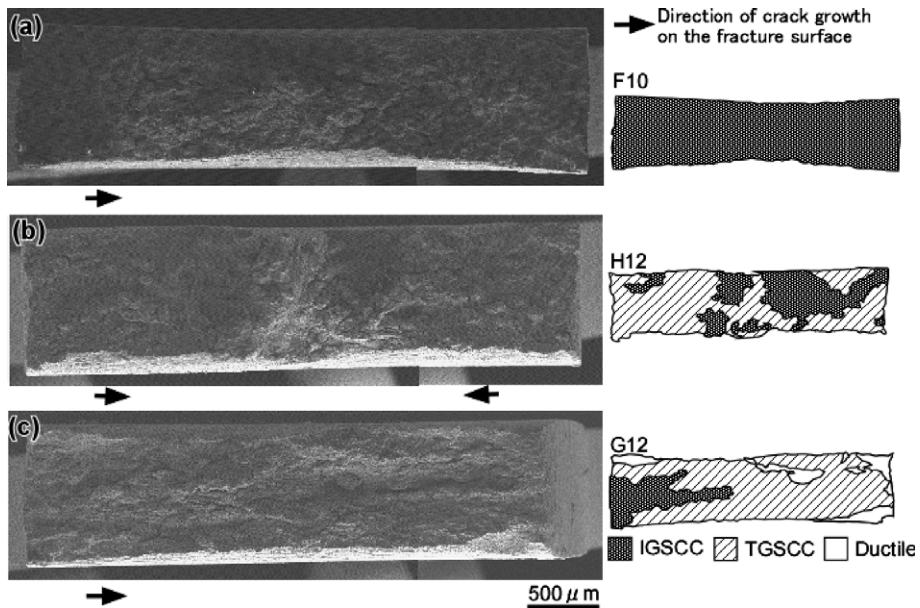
Fracture surface and schematic illustration of the specimens, (a) SA, (b) TS and (c) CW material.
